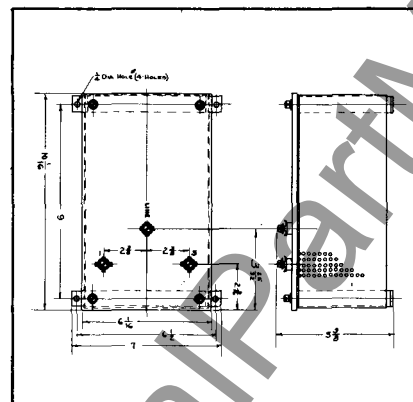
Outline dimensions and Drilling. Plan for Reaction Compensation used with Single Phase Varmeter.
